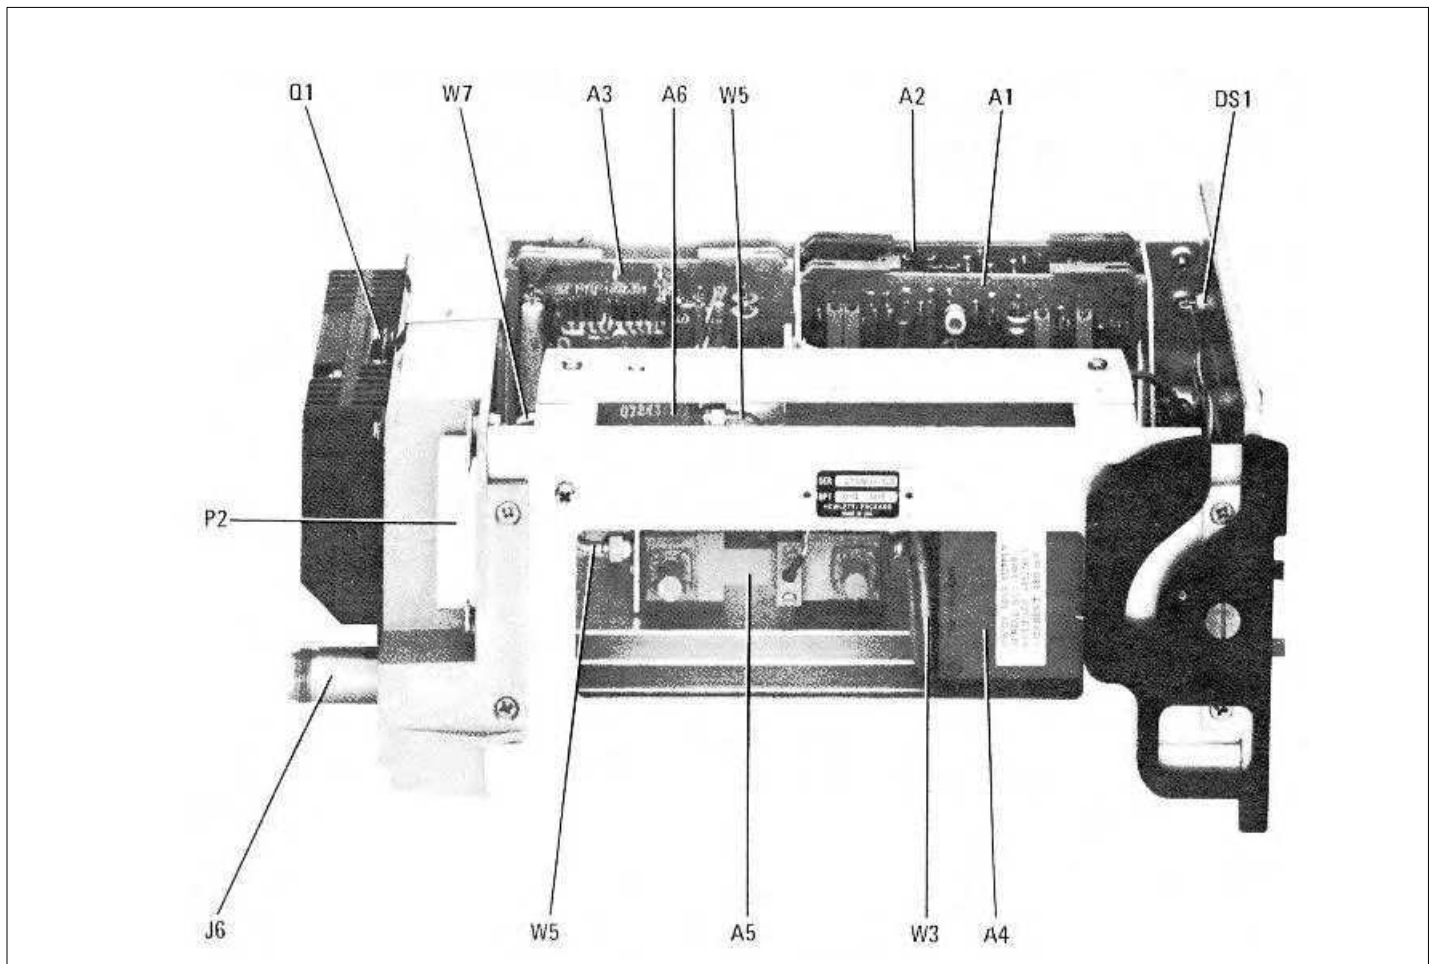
Location of Major Assemblies, Left Side View (Option 001/004)
